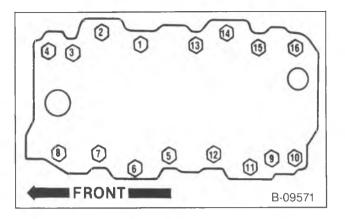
Intake Manifold Bolt Tightening Sequence (7.4L Engines)
